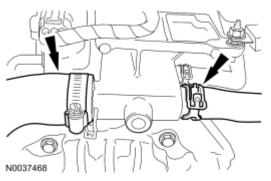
Locating Upper Radiator And Heater Hoses Courtesy of FORD MOTOR CO.
